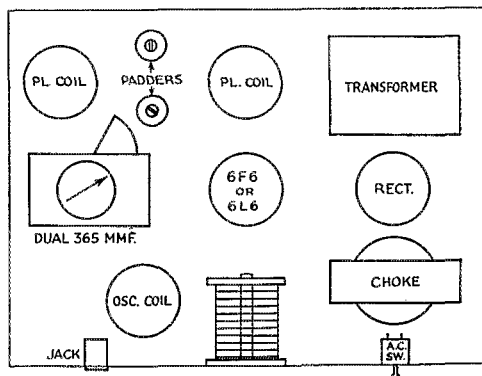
SUGGESTED LAYOUT FOR THE CIRCUIT OF FIG. 2
